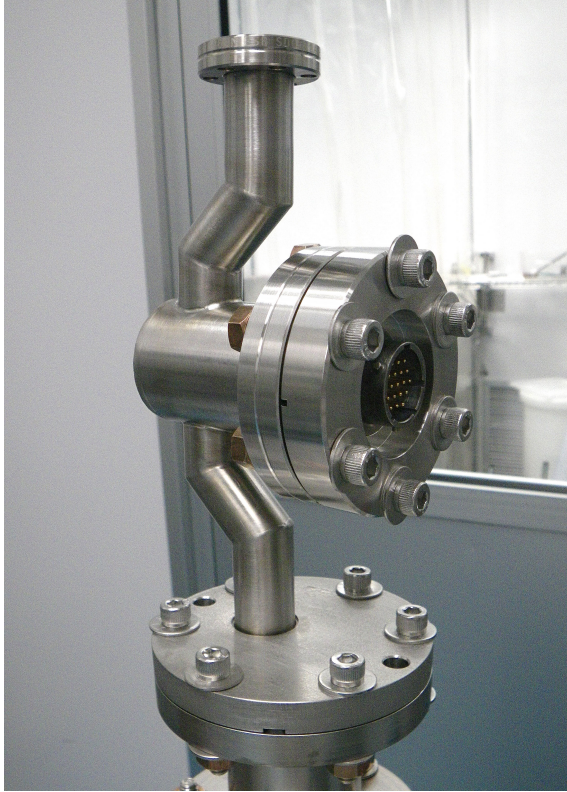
Intermediate assembly stages of the thermal finger and inner conductor components of the DC Field Dependence Cavity.
